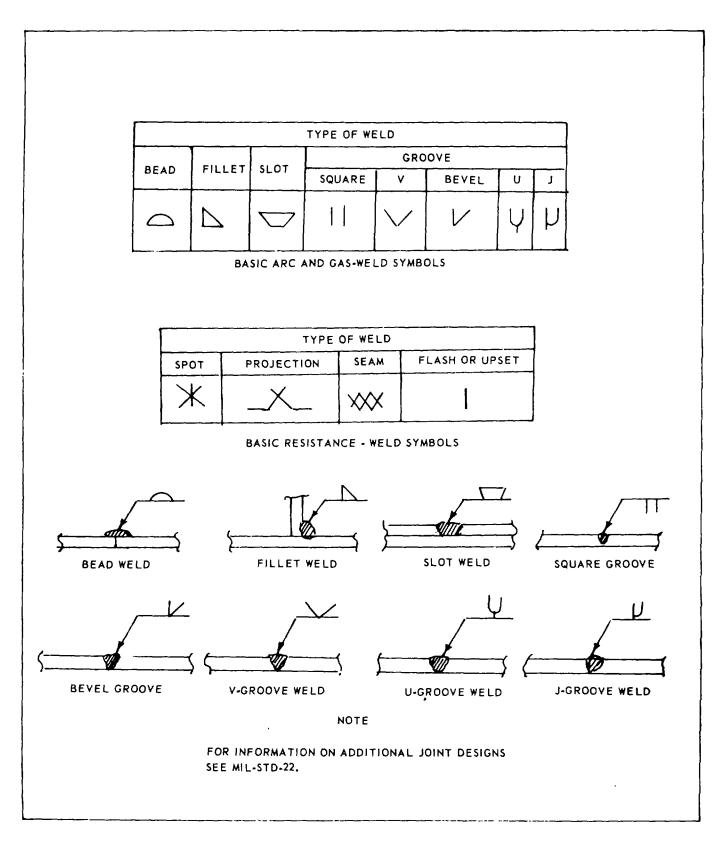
WELD SYMBOLS AND BASIC TYPES OF JOINTS AND WELDS.
